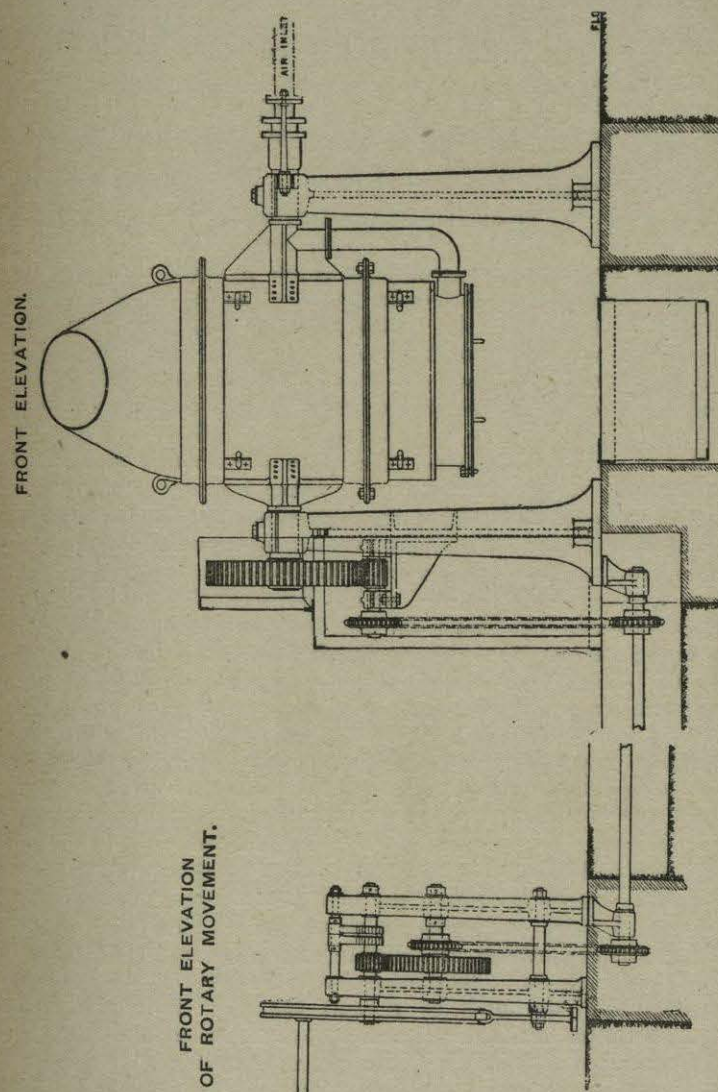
Walrand Legénisel Converter, showing hand rotating gear.
